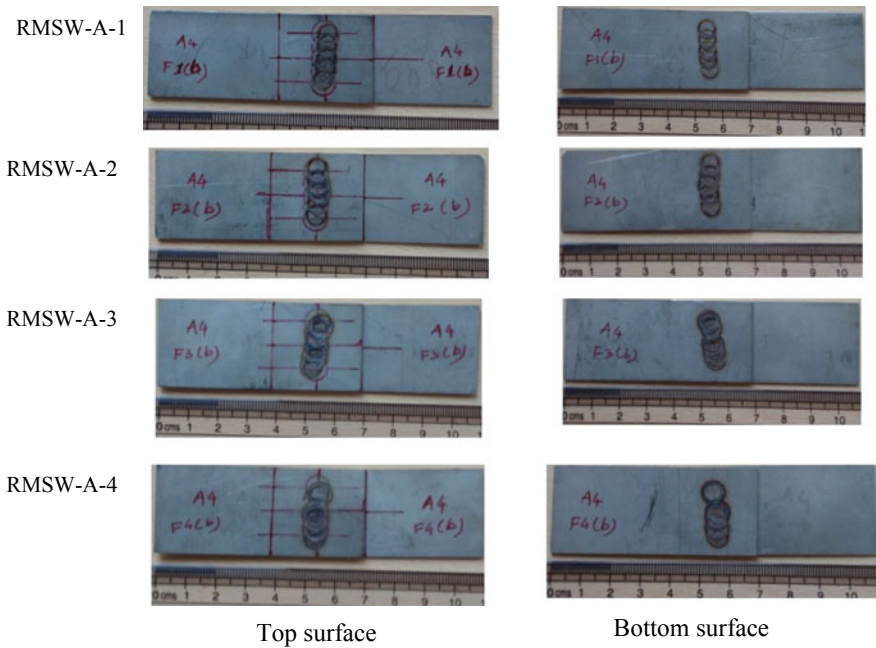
Photographs of resistance multi-spot welded samples of SS304 of 0.8 mm thickness
